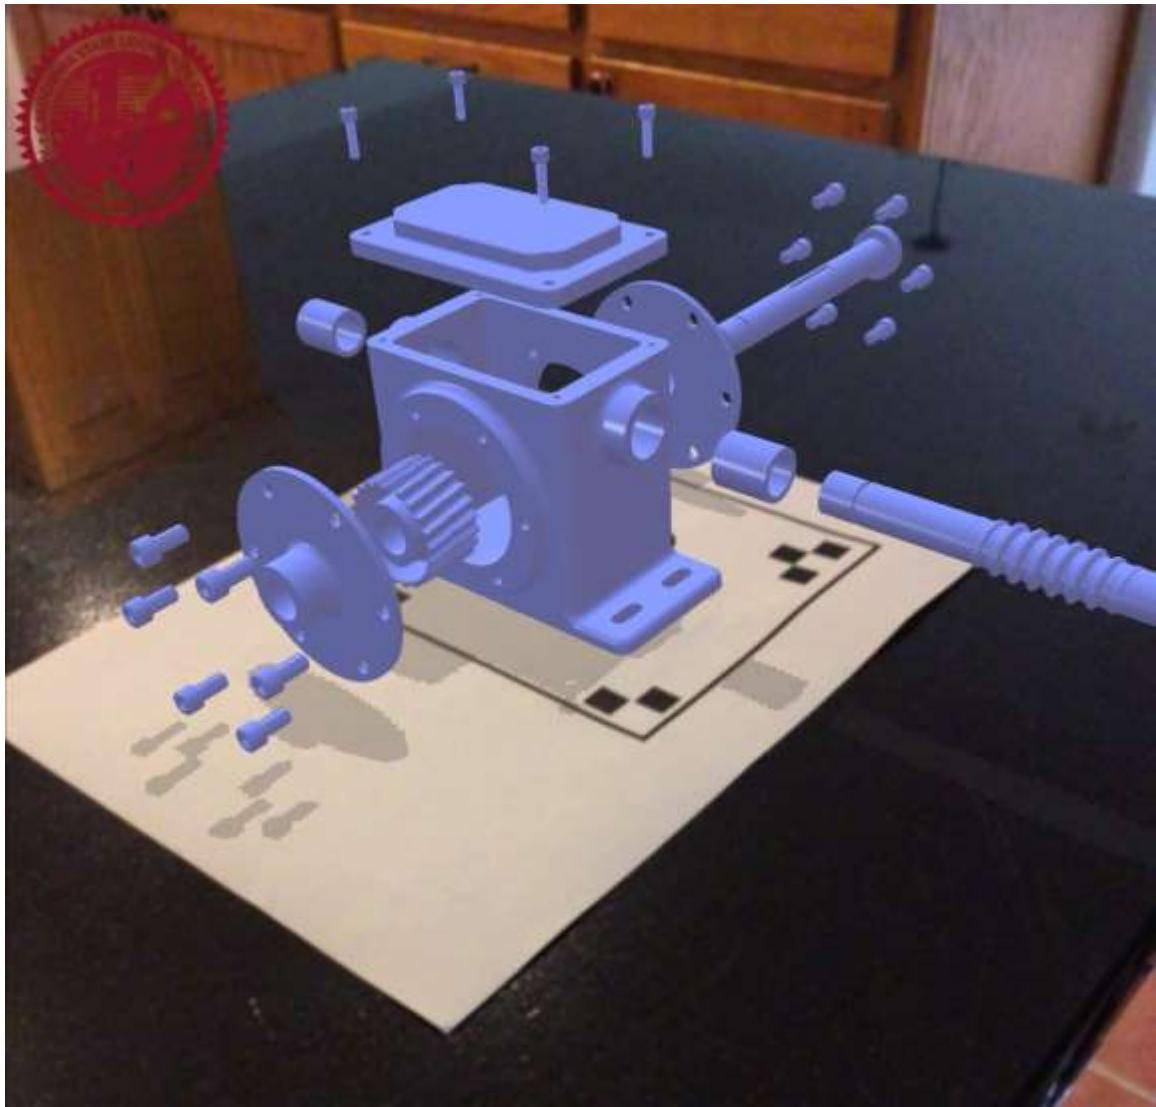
Augmented reality environment with Augment® software depicting an exploded view of a gear box assembly from Alejandro Reyes' *Beginner's Guide to SolidWorks® 2015*.
